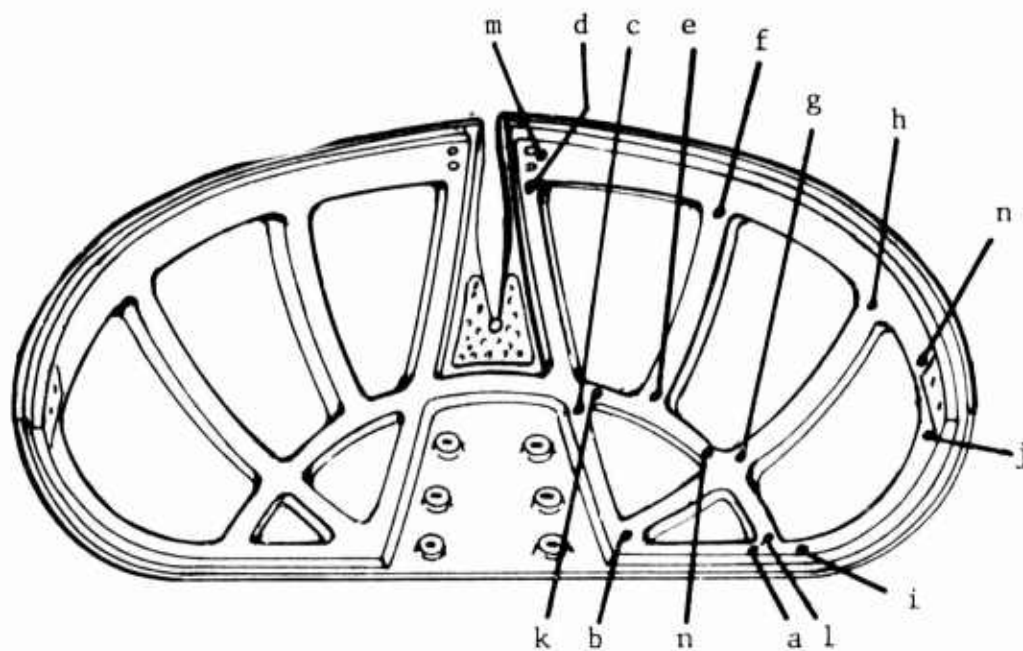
Showing Typical Star Lay-up Over Rib Junctions Reinforcing the Joint.
